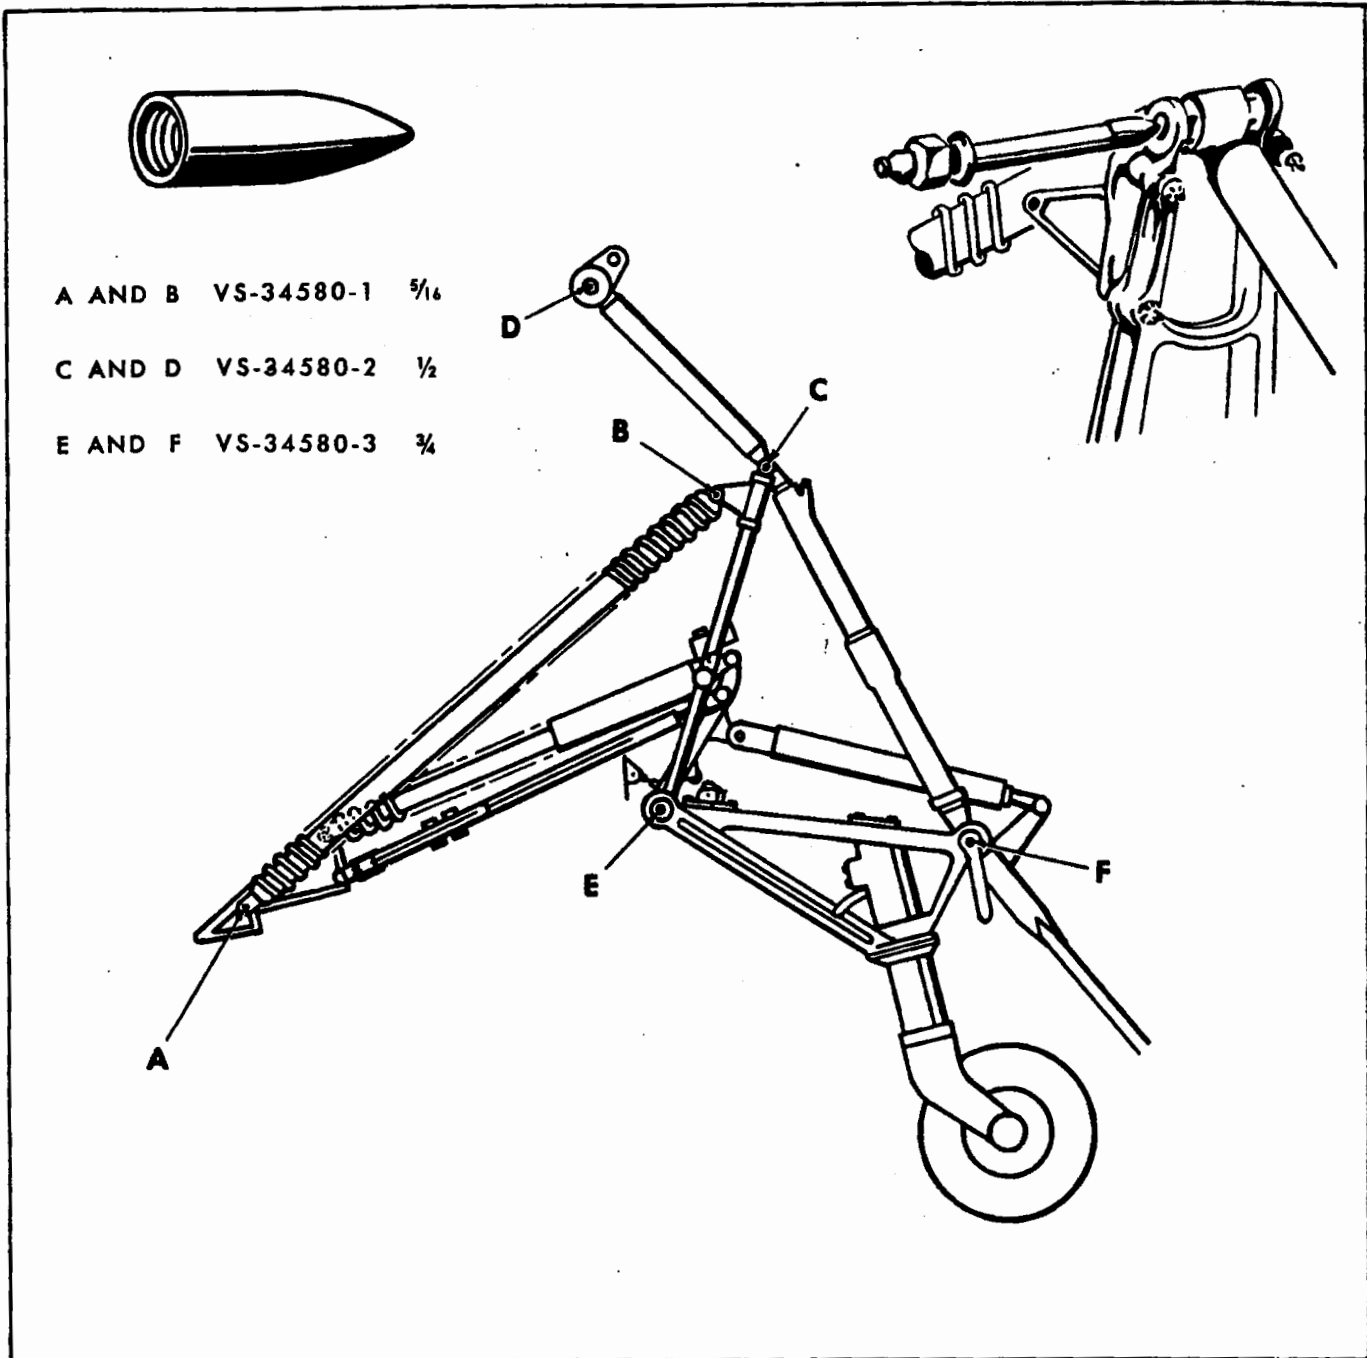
Bolt Pilots - Used for Installing Bolts in Tail Gear Assembly.
